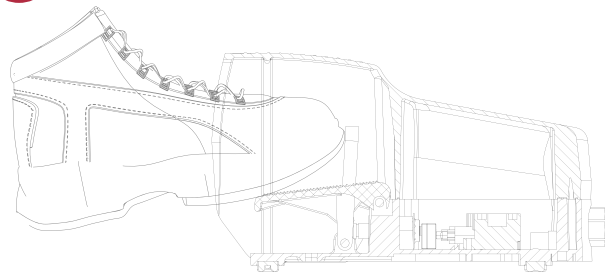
& 2 (Internal Assembly): During installation, ensure that the internal trigger lever and return spring move freely. The mechanical alignment shown in the cross-sections determines the pedal's sensitivity.
